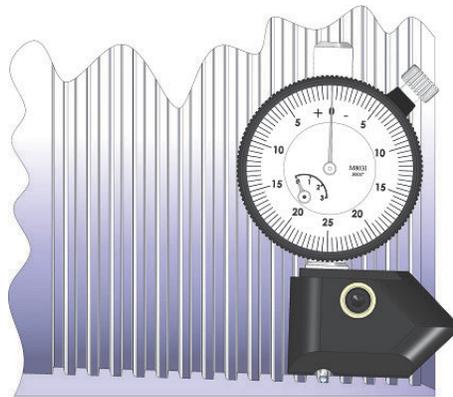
Internal Thread Height Gauge on Coupling Threads (Buttress Thread Height Gauge)
